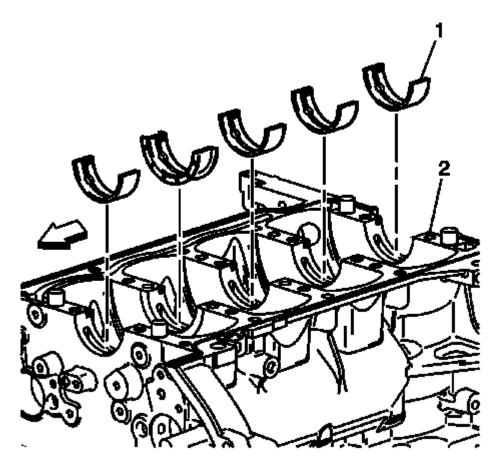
Upper Crankshaft Bearings Courtesy of GENERAL MOTORS COMPANY
